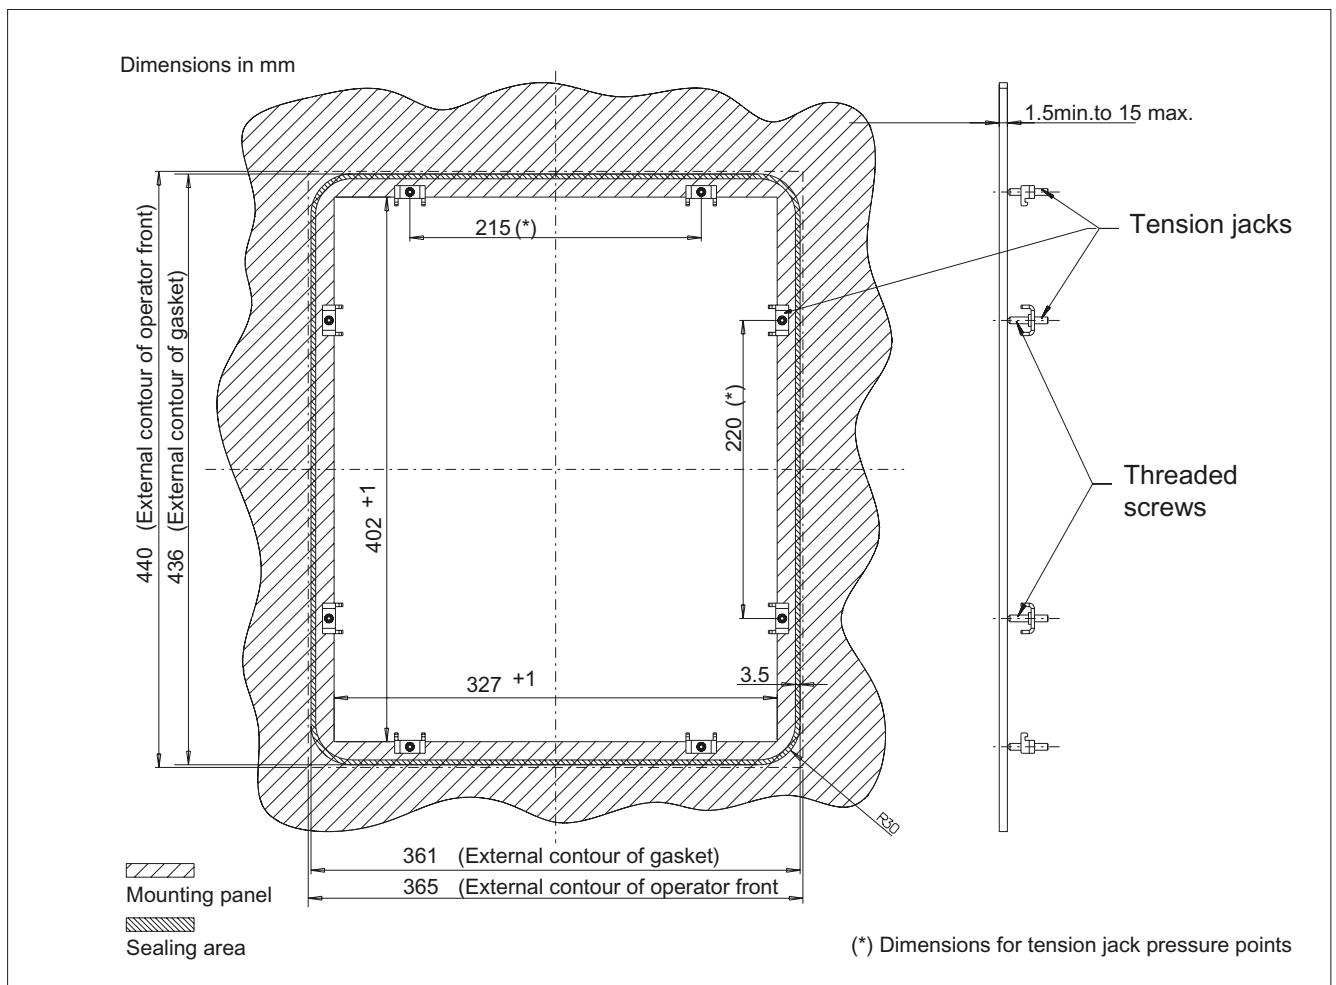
Dimension sheet for installing the OP 012T operator panel front
